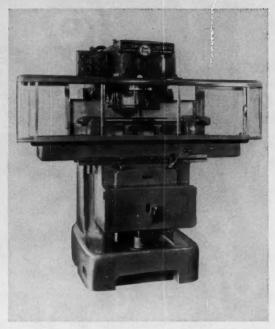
External gear-shaving machine with special long table brought out by National Broach & Machine Co.
